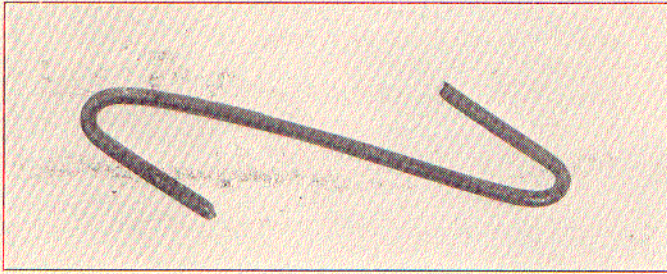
A Sister Hook Made From Old Steel Contact Wire
